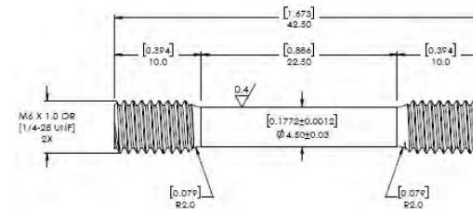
Machined Metal AM (4 mm) Tensile Bar With Threads
